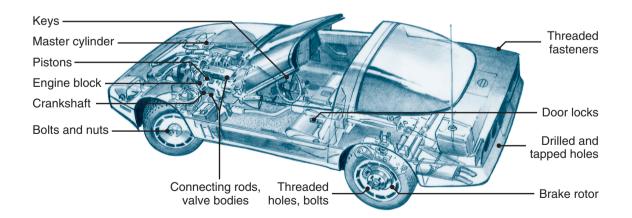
Typical parts on an automobile that require machining operations to impart desirable shapes, surface characteristics, dimensions, and tolerances.
